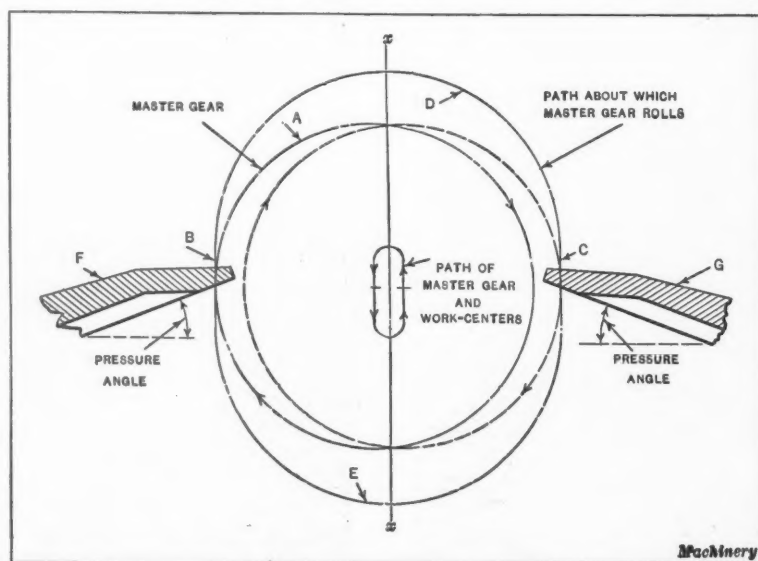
Diagram illustrating Action of Master Gear and Work relative to Grinding Wheels on Rotary Type of Machine
